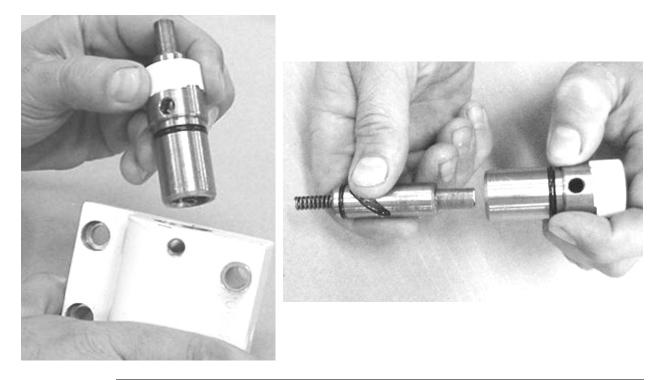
Removing Stem and Adapter from Valve Body (left) and Removing Stem from Adapter (right)
